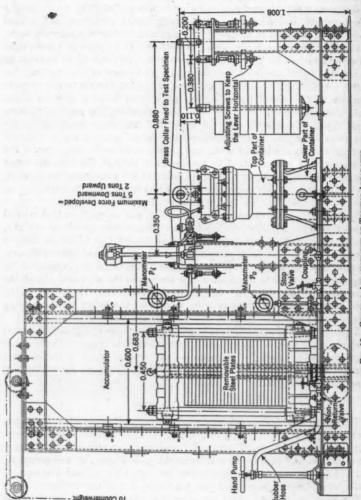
GENERAL ARRANGEMENT OF TESTING APPARATOS
